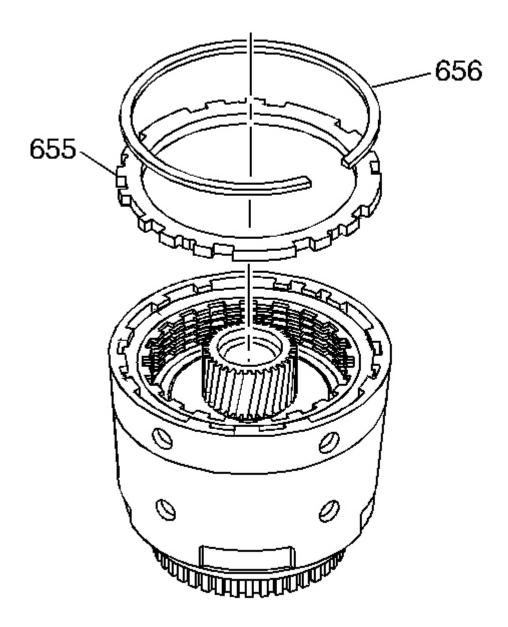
Locating 3rd & 4th Clutch Selective Backing Plate & Retainer Ring Courtesy of GENERAL MOTORS CORP.
